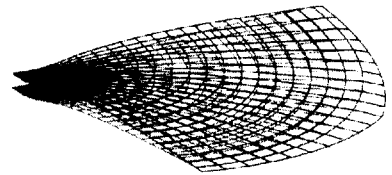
Deformed shape before and after unloading (after cutting) at the punch stroke of 7.62 mm
